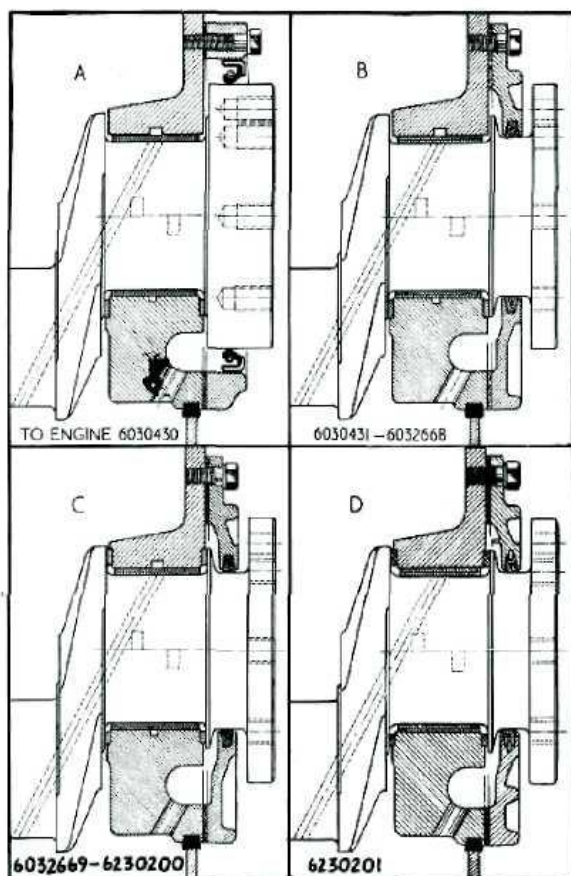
Engine Rear Seal and Crankshaft Arrangements.
